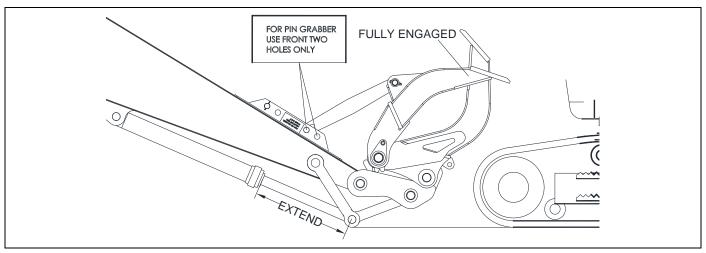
Stiff Arm and Mounting Pad Position With Carrier Equipped With Pin Grab Coupler
